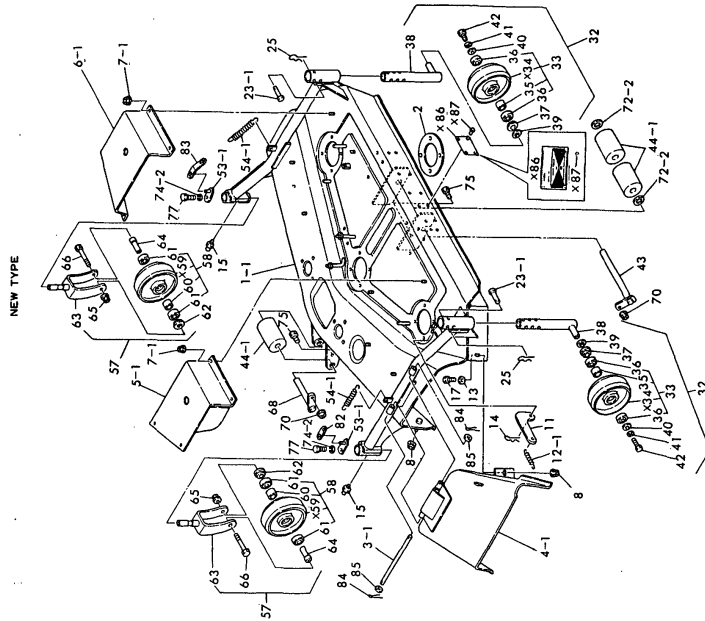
DECK & GAUGE WHEEL (FOR FRENCH)
